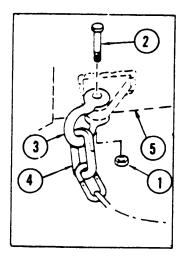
Trailer Safety Chain Assembly (ARMY)
